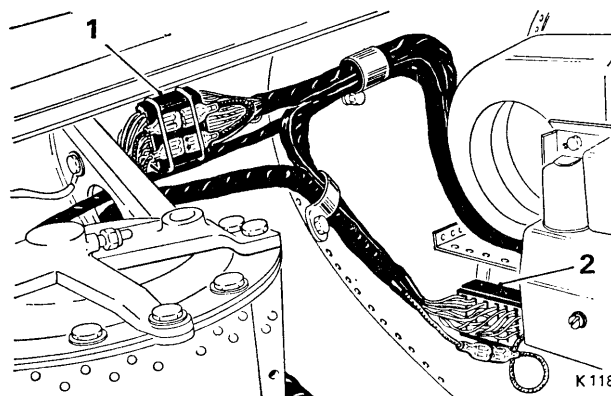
ENGINE LOOM PLUG AND SOCKET
